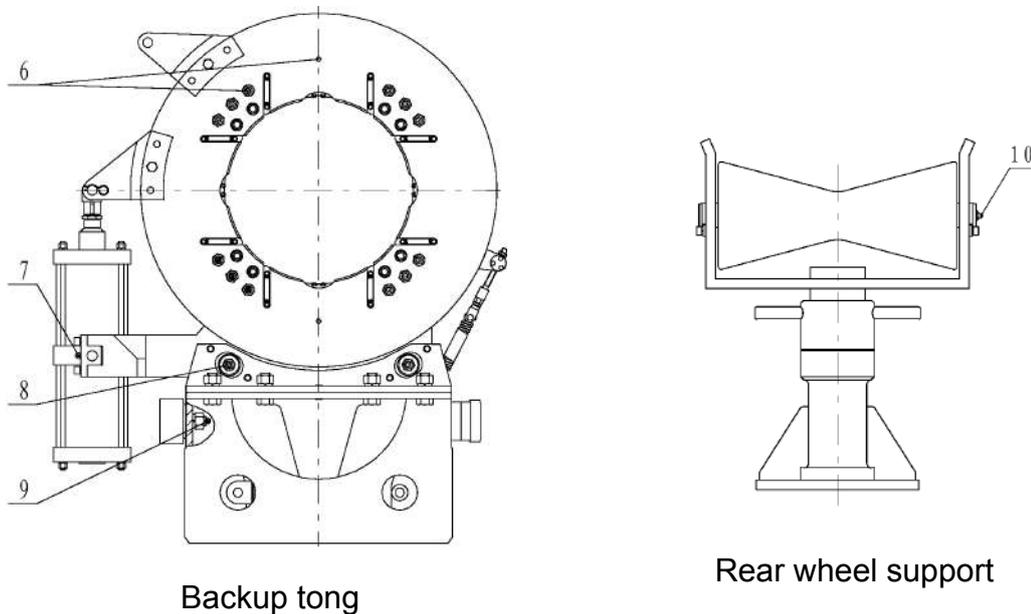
Lubrication Illustration for Backup Tong and Rear Wheel Support
